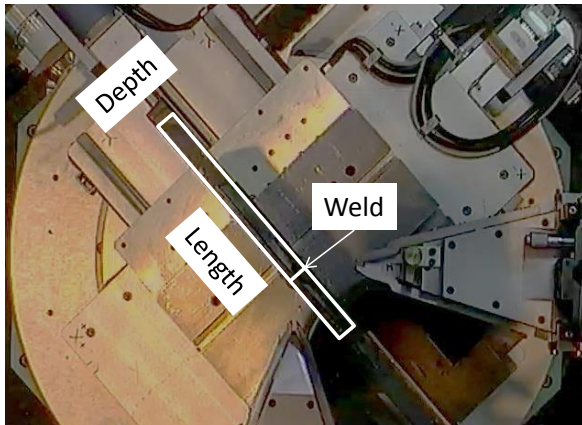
Photograph of a welded mild steel plate sample setup for measured on MPISI.
